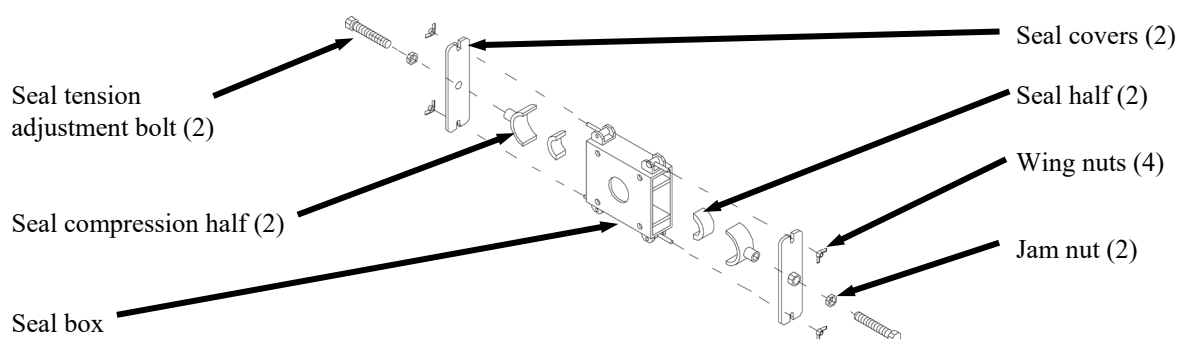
Felt Auger Shaft Seal, Exploded View
